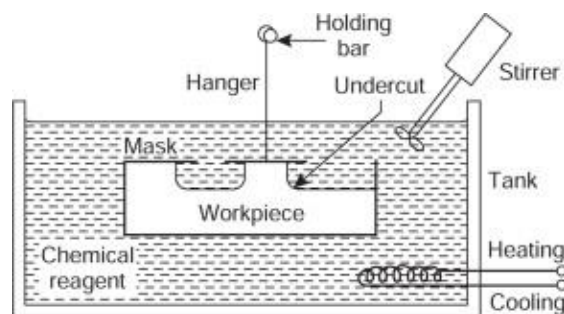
Typical chemical machining setup (Hofy 2005; Çakir et al.,2007)
